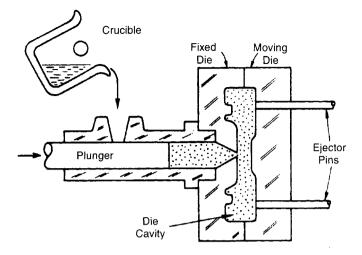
Die casting. Liquid is forced under pressure into a split metal mould.
